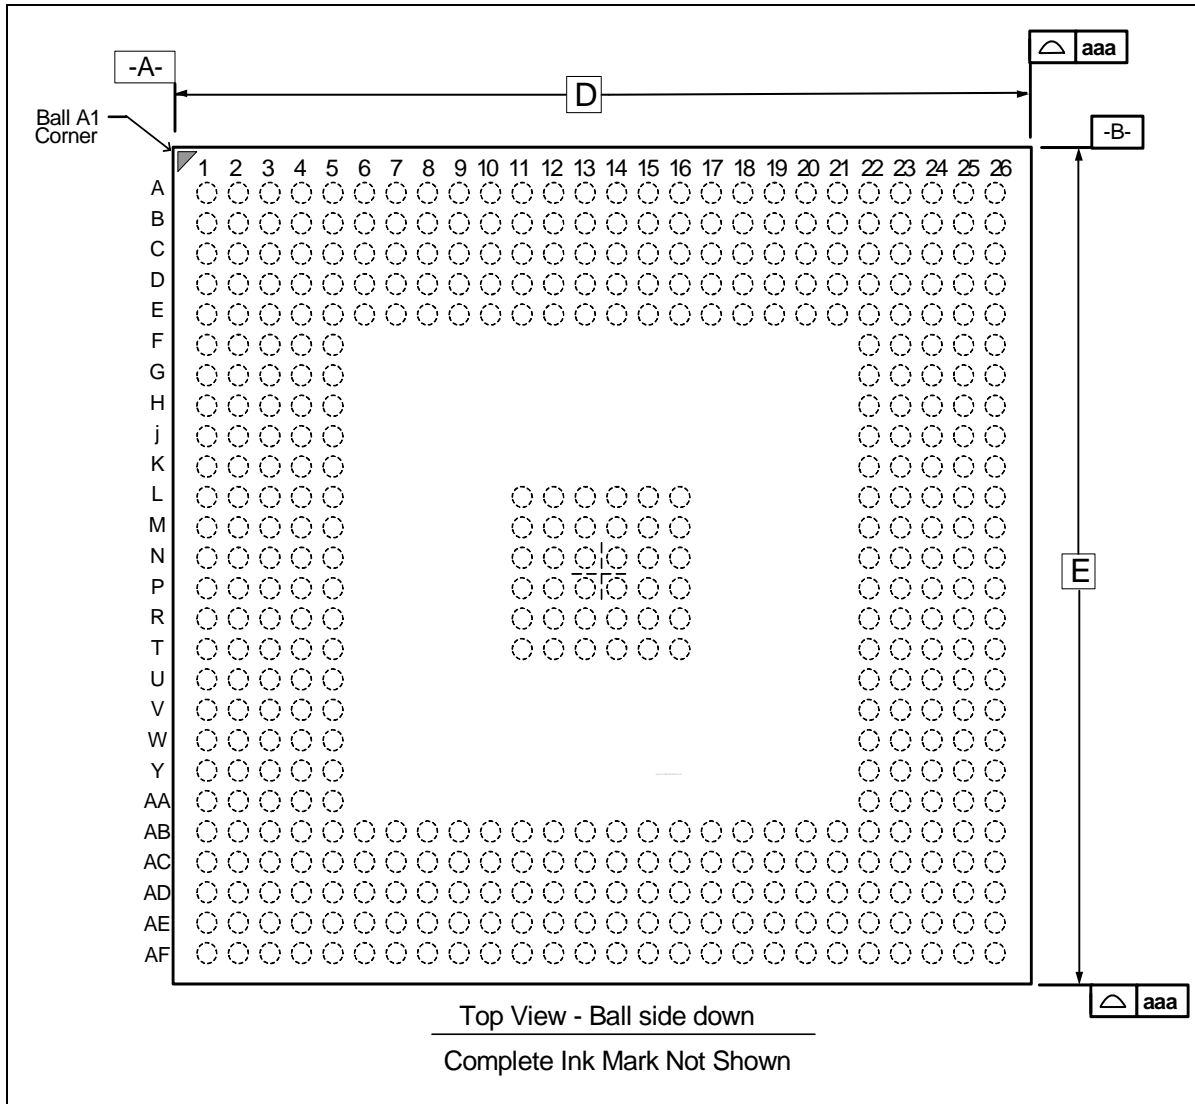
PXA320 Processor 14x14 mm VF-BGA Package, Bottom View
